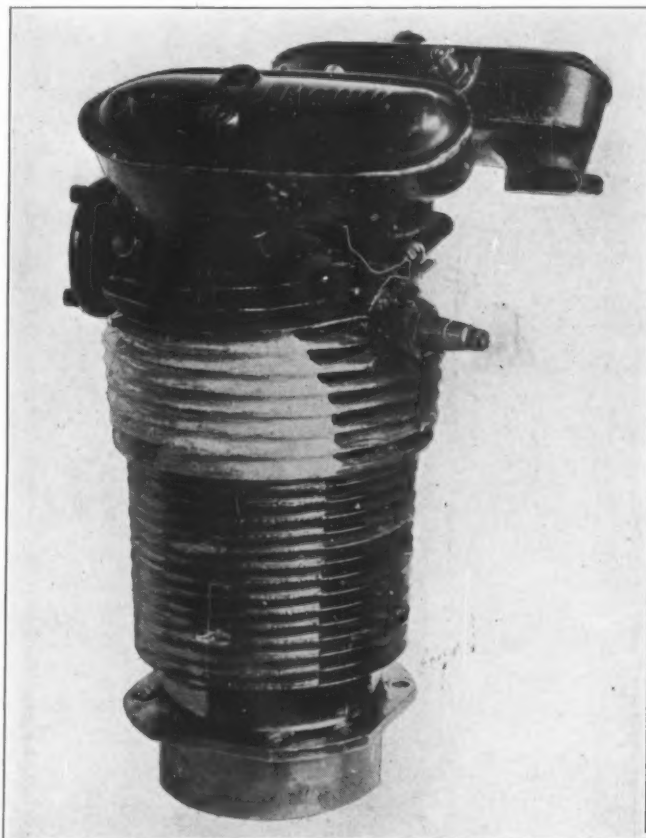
Welded shrouding on airplane cylinder permits uniform cooling by carrying cool air from forward side to rear through shrouded fins
